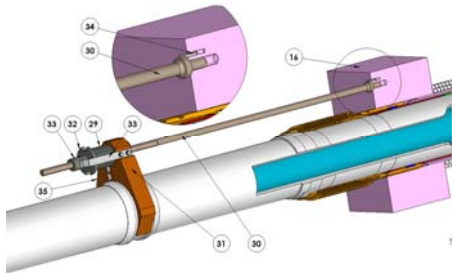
Schematic representation of lock pin mounting for rod positioning
